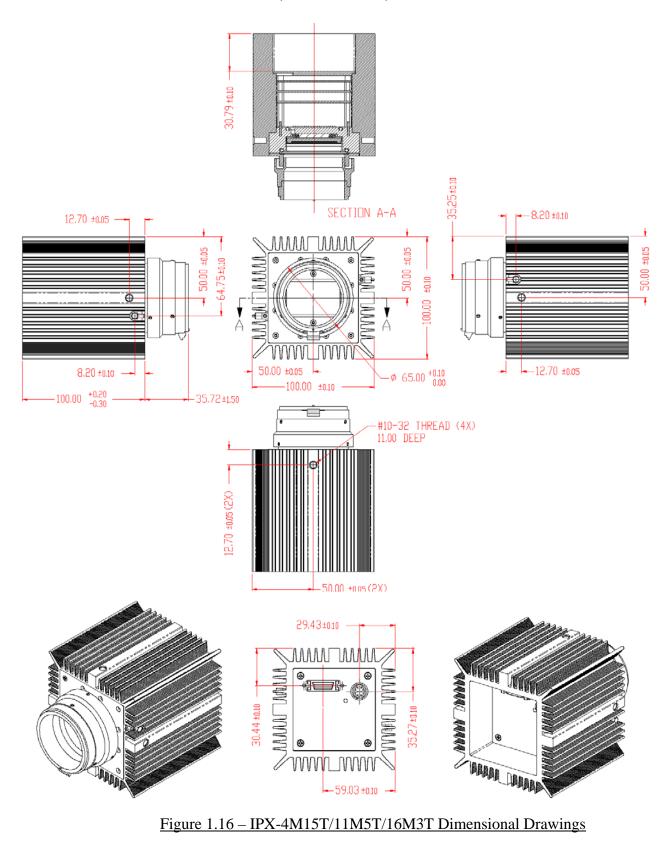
IPX-4M15T/11M5T/16M3T Dimensional Drawings
